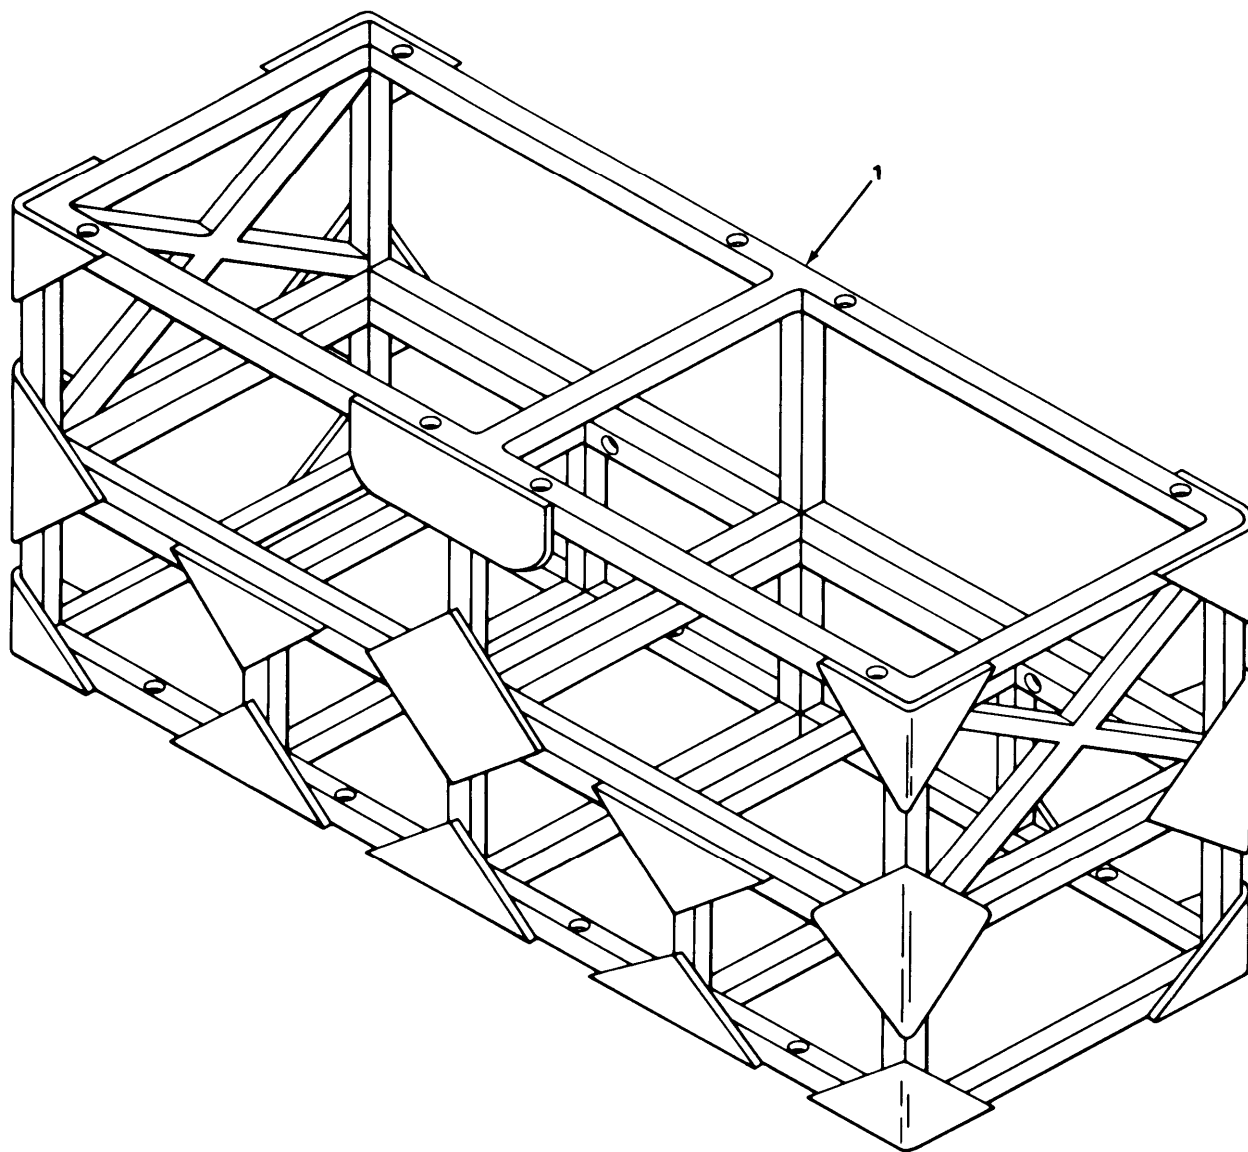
Installation Kit MK-1818/GSG-10(V), Rack Assemblies (Sheet 2 of 3).
